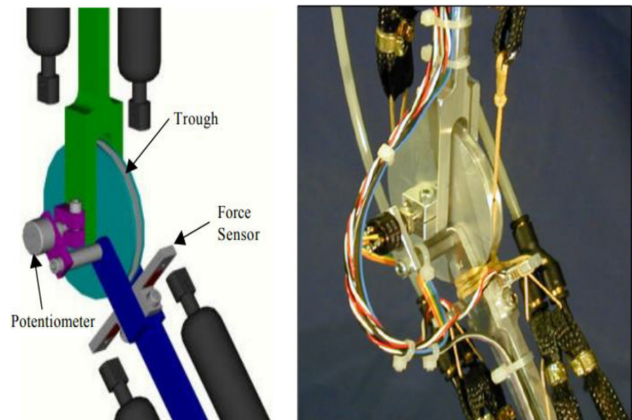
The hip rotational joint is depicted in both CAD design and picture.
